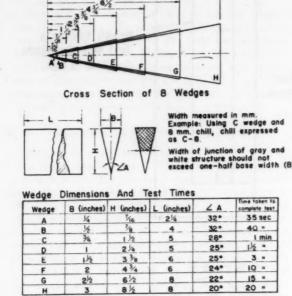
Dimensions of wedge test pieces recommended by Sub-Committee T. S. 6, Technical Council, I.B.F.
